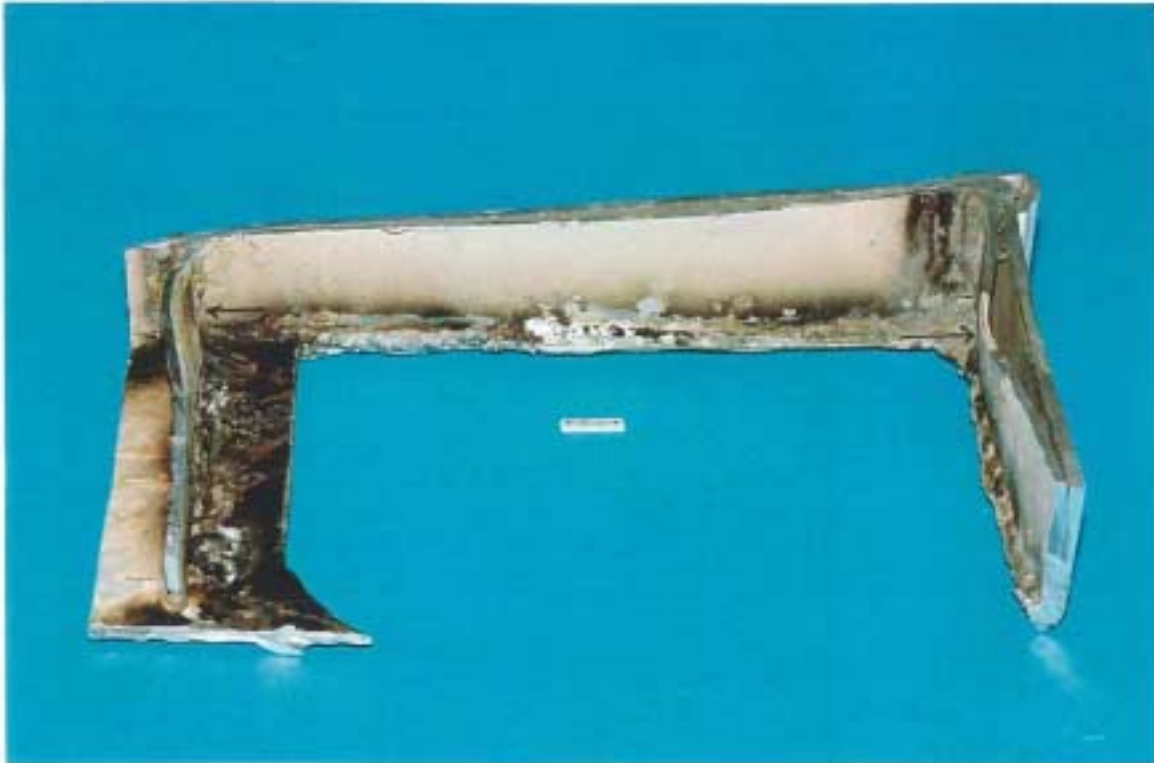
Under-floor section, showing buckling damage to forward and aft transverse members (arrowed).
